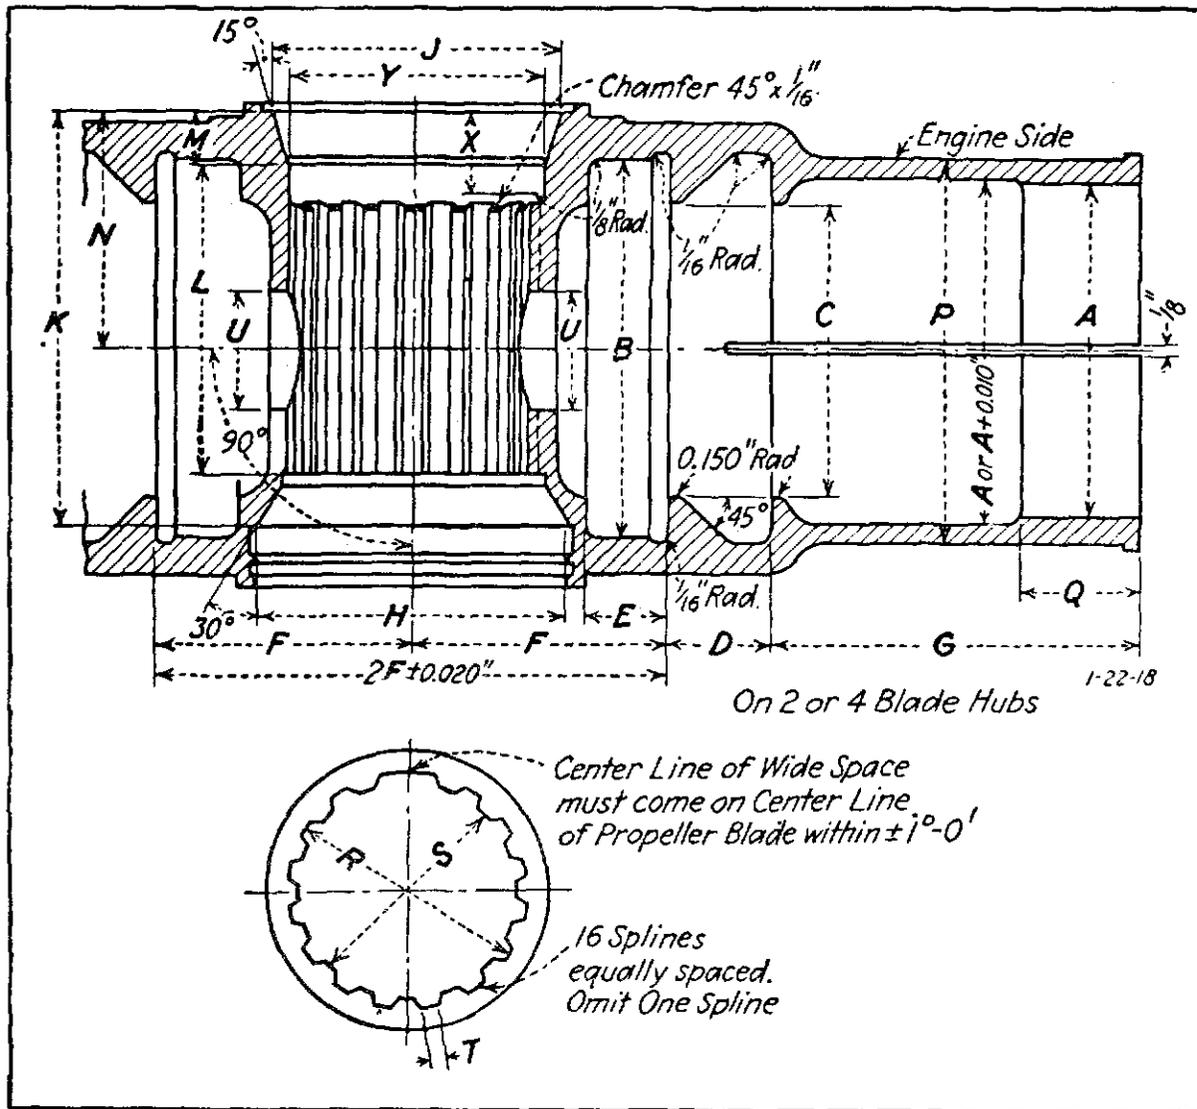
DETACHABLE ALUMINUM-ALLOY BLADE TYPE, FORGED STEEL HUB DIMENSIONS.
